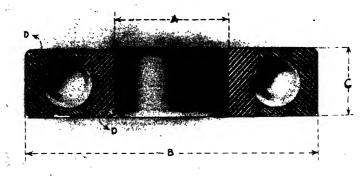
LEADING DIMENSIONS OF RADIAL BALL BEARING
